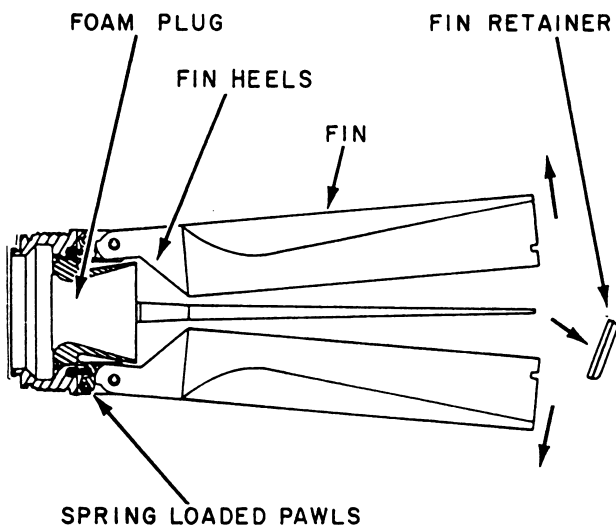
Mk 16 motor, nozzle, and fin assembly.
